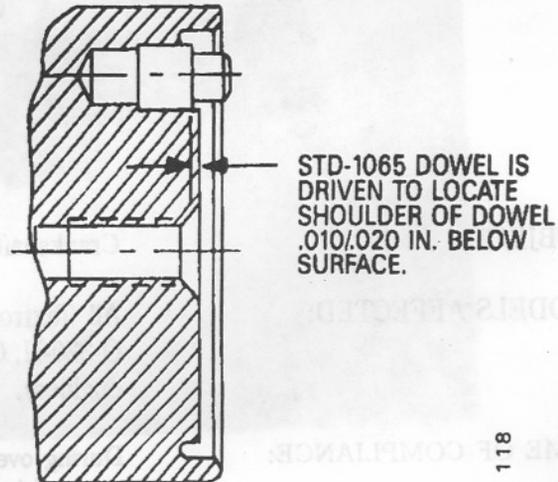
Section Thru End of Crankshaft Showing Driven Height of STD-1065 Dowel
